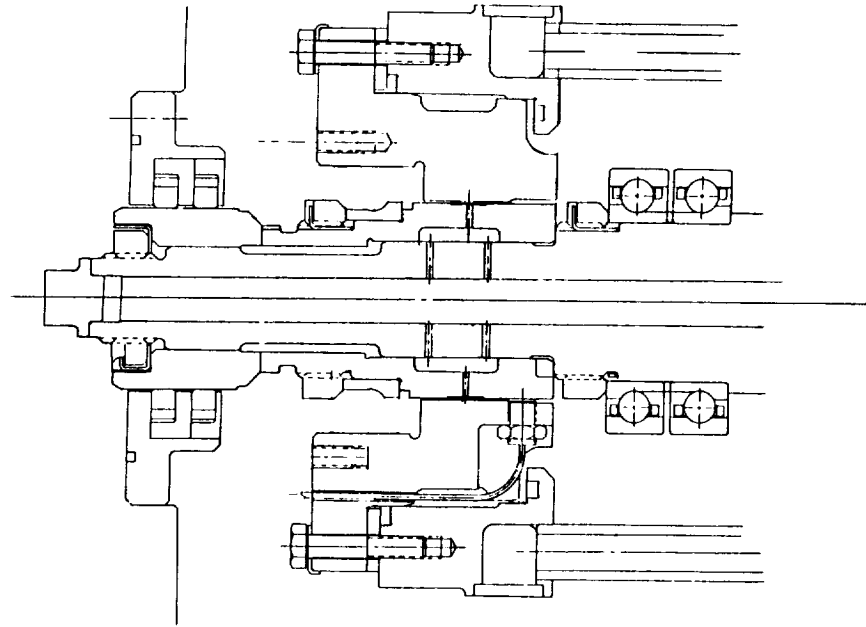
Cross section of internally fed bearing. Freon flows right to left through hollow shaft, and outward into rotating manifold.
